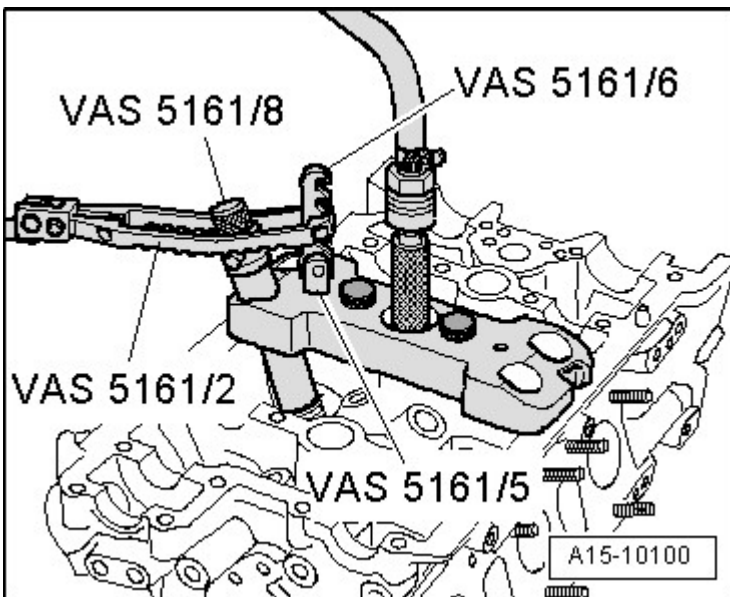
Identifying Engaging Device VAS 5161/6 With Installation Fork VAS 5161/5 Installed Into Guide Plate
